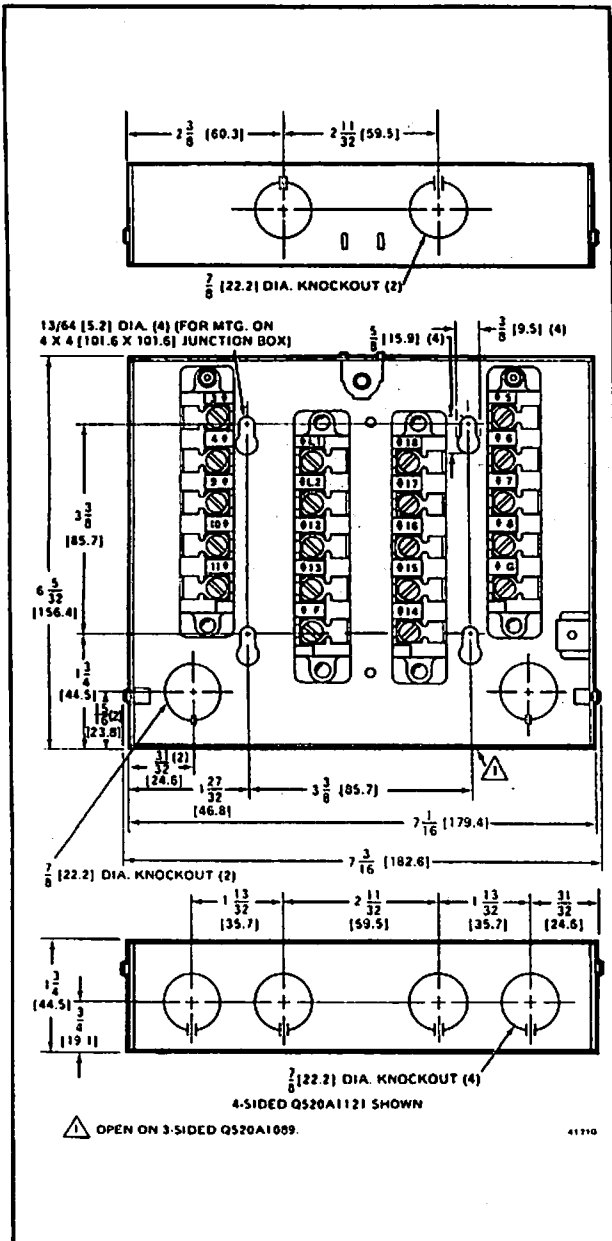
MOUNTING DIMENSIONS OF THE Q520A WIRING SUBBASE, IN in. [mm SHOWN IN BRACKETS].
